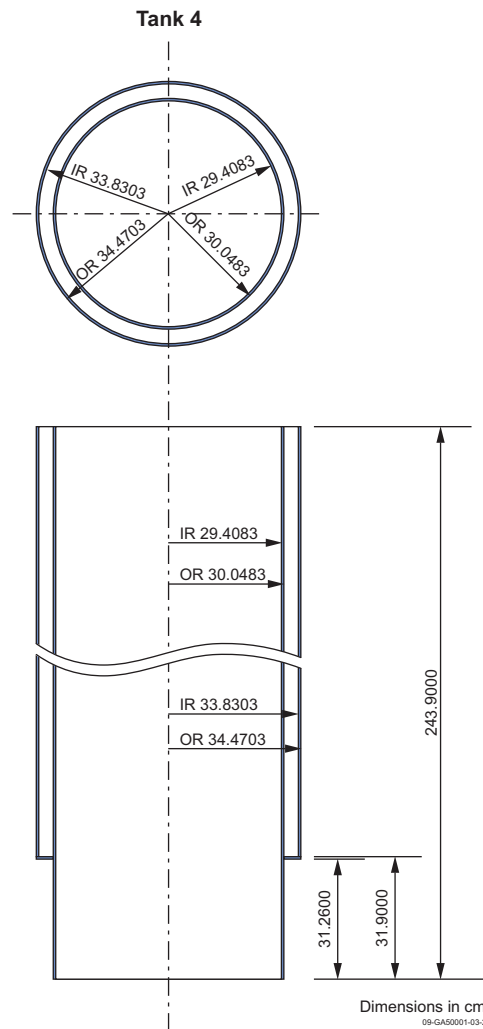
Tank 4 Dimensions Simple Model, bottom 31.26 cm is the Extended Skirt.
